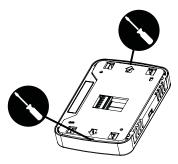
Insert a flat-head screwdriver into one of the slots and twist gently
